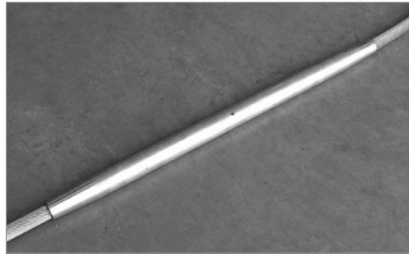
Slide the Aluminum sleeve over the installed Steel sleeve.
